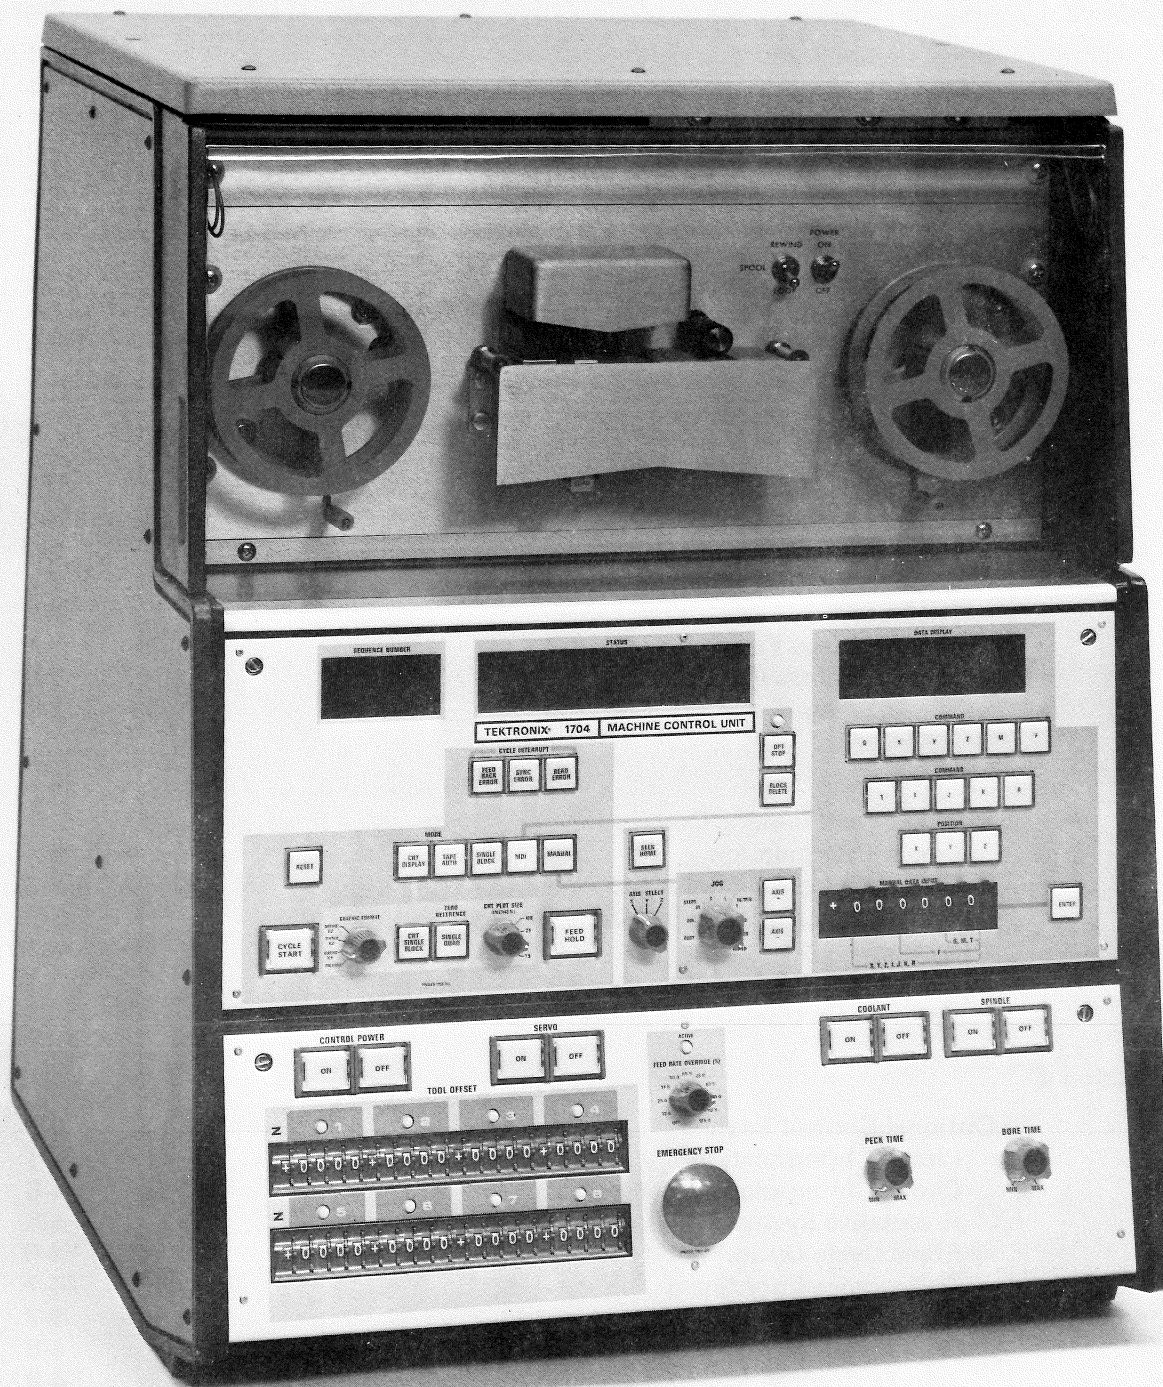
Tektronix 1704 Machine Control Unit.
